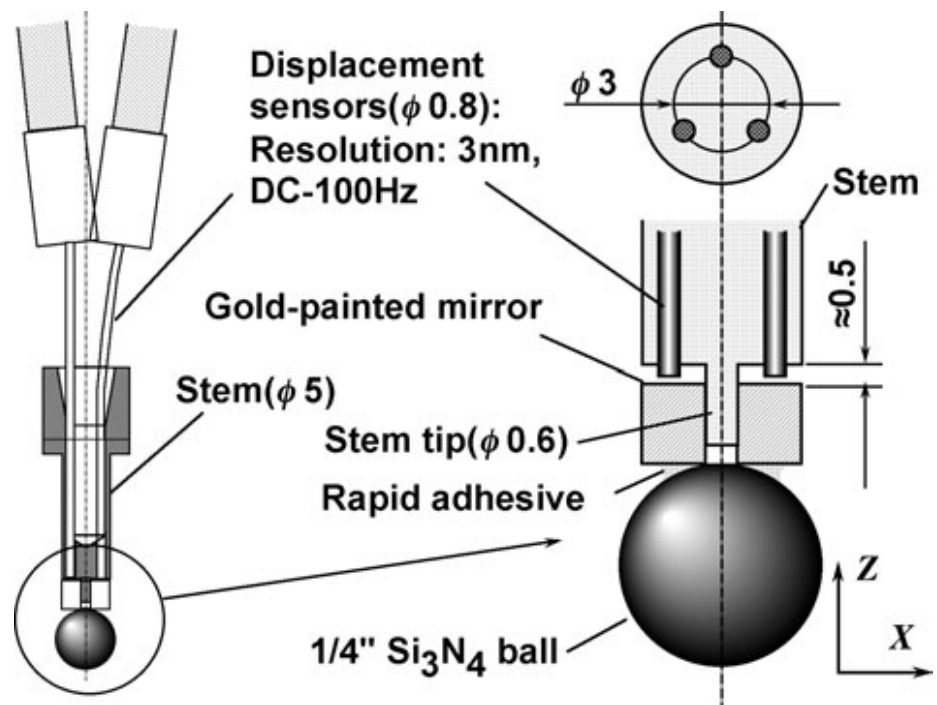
Sectional and detailed view of the probe system with three displacement sensors
